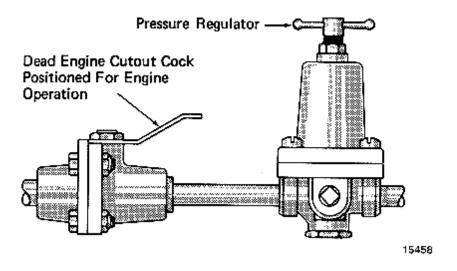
Dead Engine Cutout Cock And Pressure Regulator
